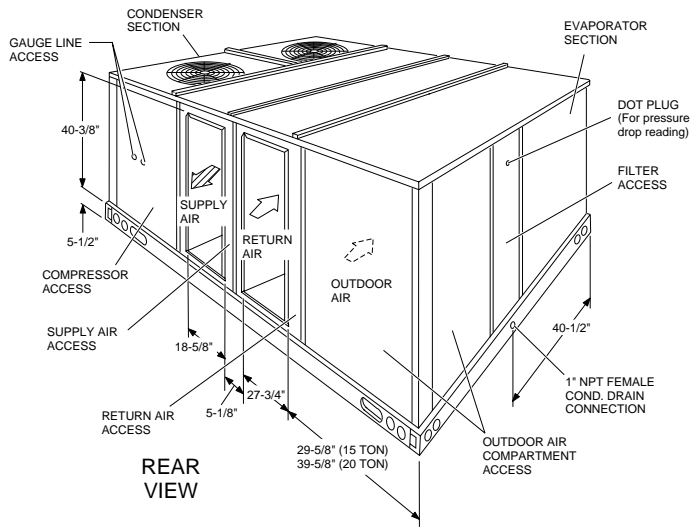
UNIT DIMENSIONS - CONT'D. (BCB - 15 & 20 TON)
